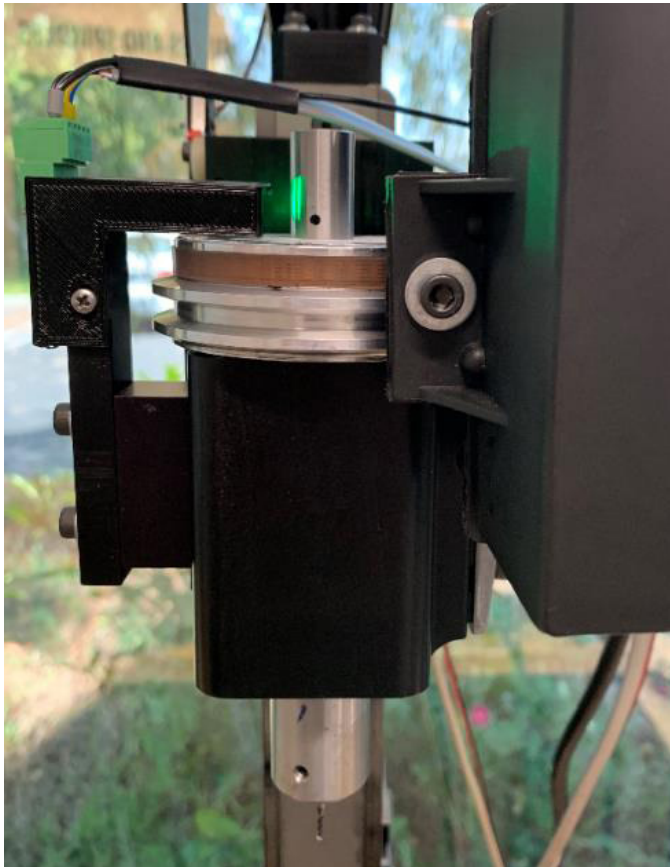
The V-belt is positioned in the high-speed, upper pulley groove.
